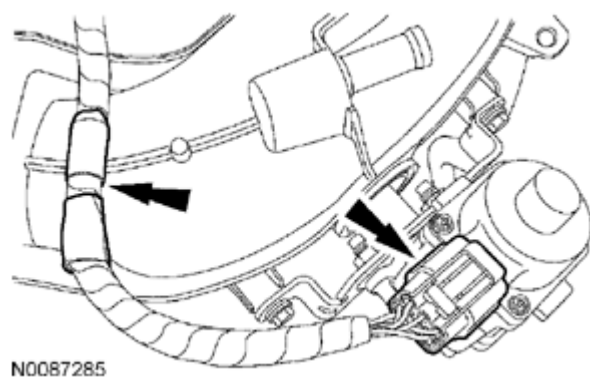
Locating EGR Regulator Electrical Connector And Wiring Retainer
